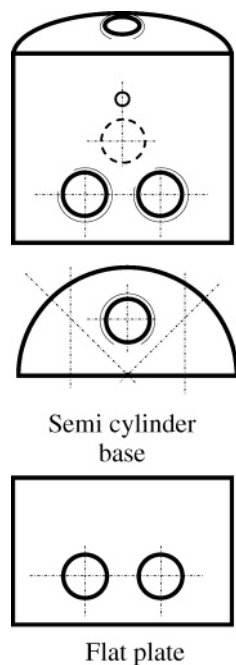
Schematic of the two clamp parts fabricated from nonmagnetic austenitic stainless steel type 316. (Top) side view of the semicylindrical base. (Middle) end view of the semicylindrical clamp base. (Bottom) plate that is screwed to semicircular part clamping wire between.
